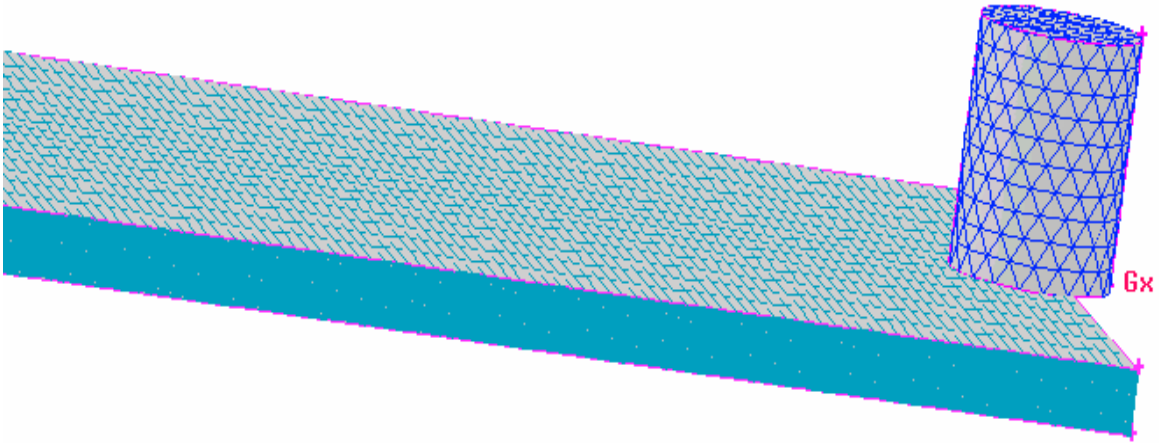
Isometric view of the meshed tool and work piece assembly
